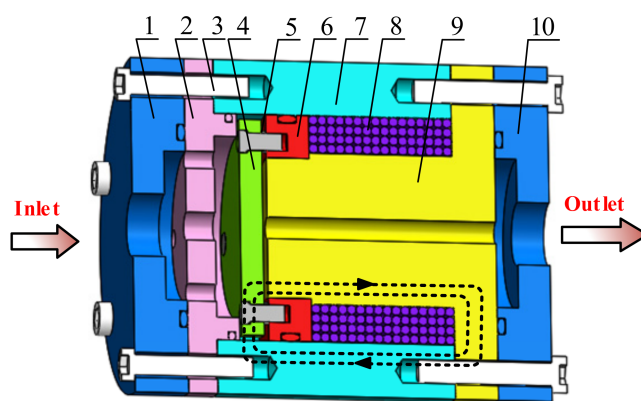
Schematic configuration of the annular-radial-orifice flow MR valve: 1. Left end cover; 2. Flow guided plate; 3. Screw; 4. Magnetic disk; 5. Washer; 6. Positioning plate; 7. Valve body; 8. Excitation coil; 9. Valve spool; 10. Right end cover.
